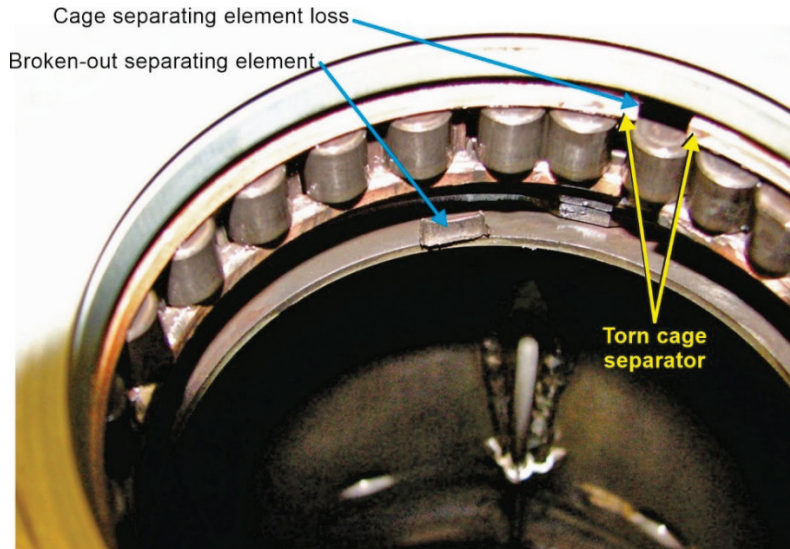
Rolling bearing with a burst cage and broken out five separating elements
